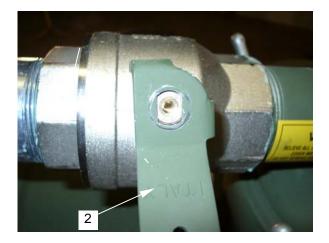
Isolation Valve Linkage and Upper Air Hose Removal
